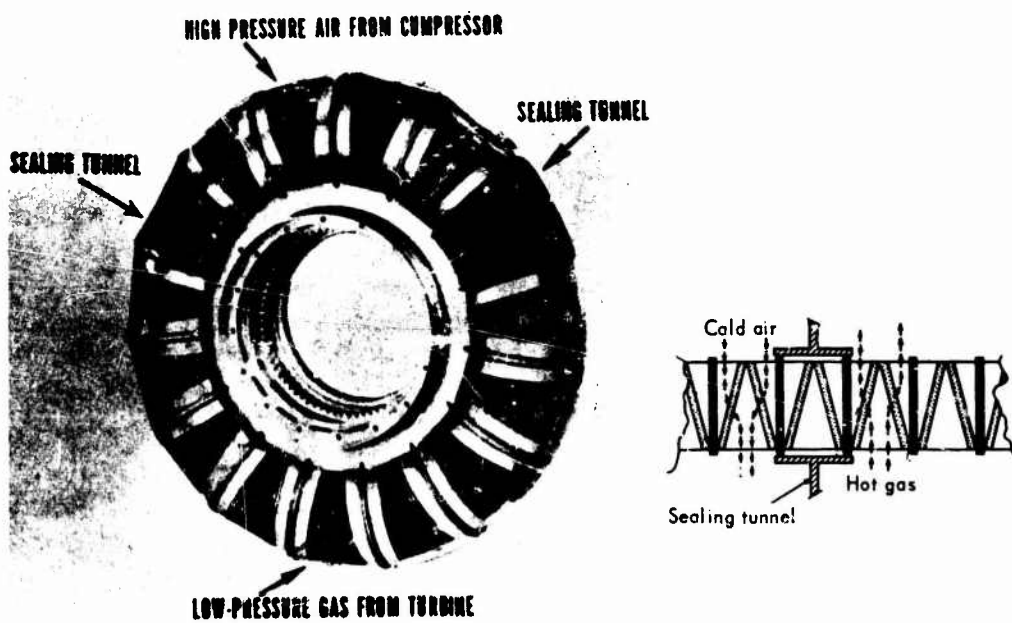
Pratt & Whitney Rotary Toroidal Regenerator, Composed of a Series of Matrix Packages
